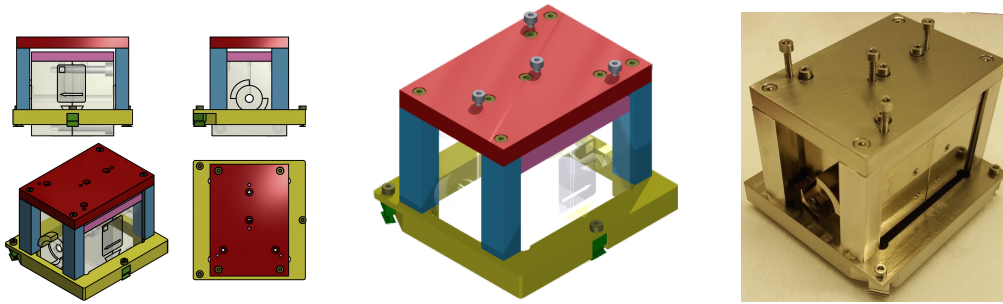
Thermally compensated mount for the Faraday rotator. Schematic drawing and 3D model are shown on the left, photograph of the assembly with a Faraday rotator is shown on the right.
